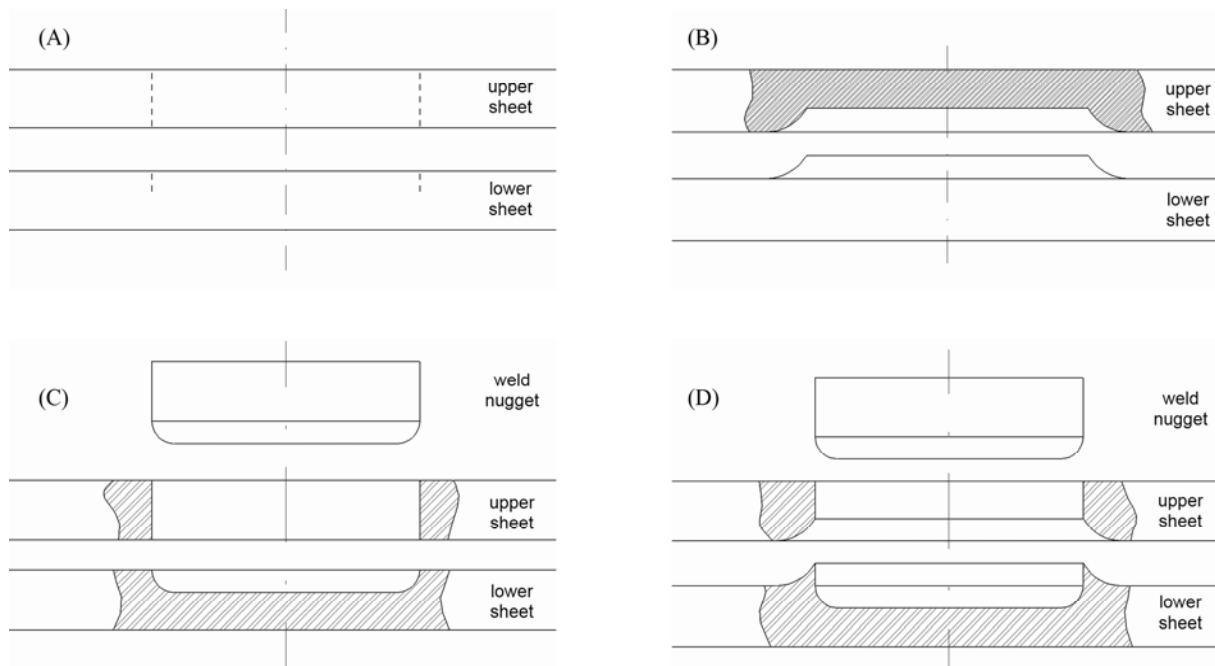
Different geometric models of the welded joint: (a) indistinct weld nugget without hook; (b) indistinct weld nugget with hook; (c) distinct weld nugget without hook; and (d) distinct weld nugget with hook.
